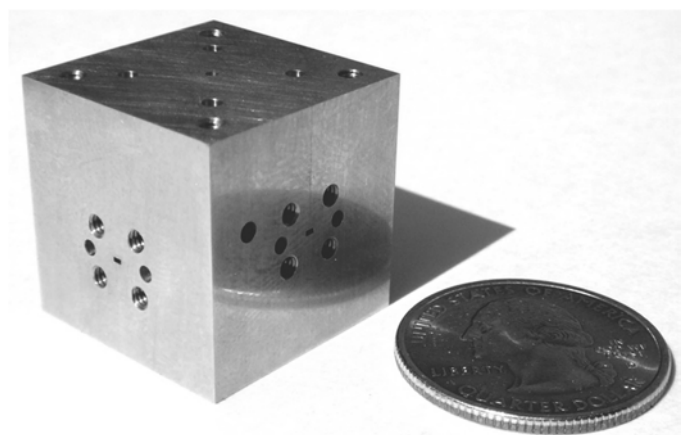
View of assembled OMT with the circular waveguide input on top and the two WR3.7 waveguide outputs with custom mini-flanges. The external dimensions are 23 mm x 23 mm x 23 mm.
